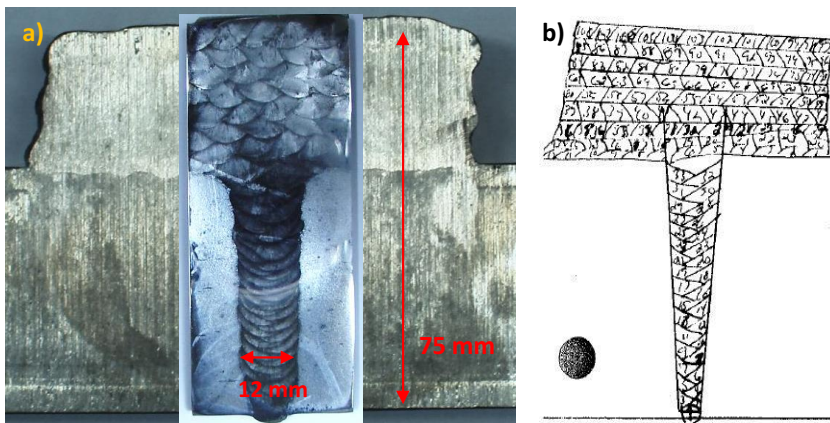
GTAW 19508A sample, cut from a cross-section of the weldment: a) the sample has been etched to reveal the weld passes corresponding to b) the scheme of the weld passes.
